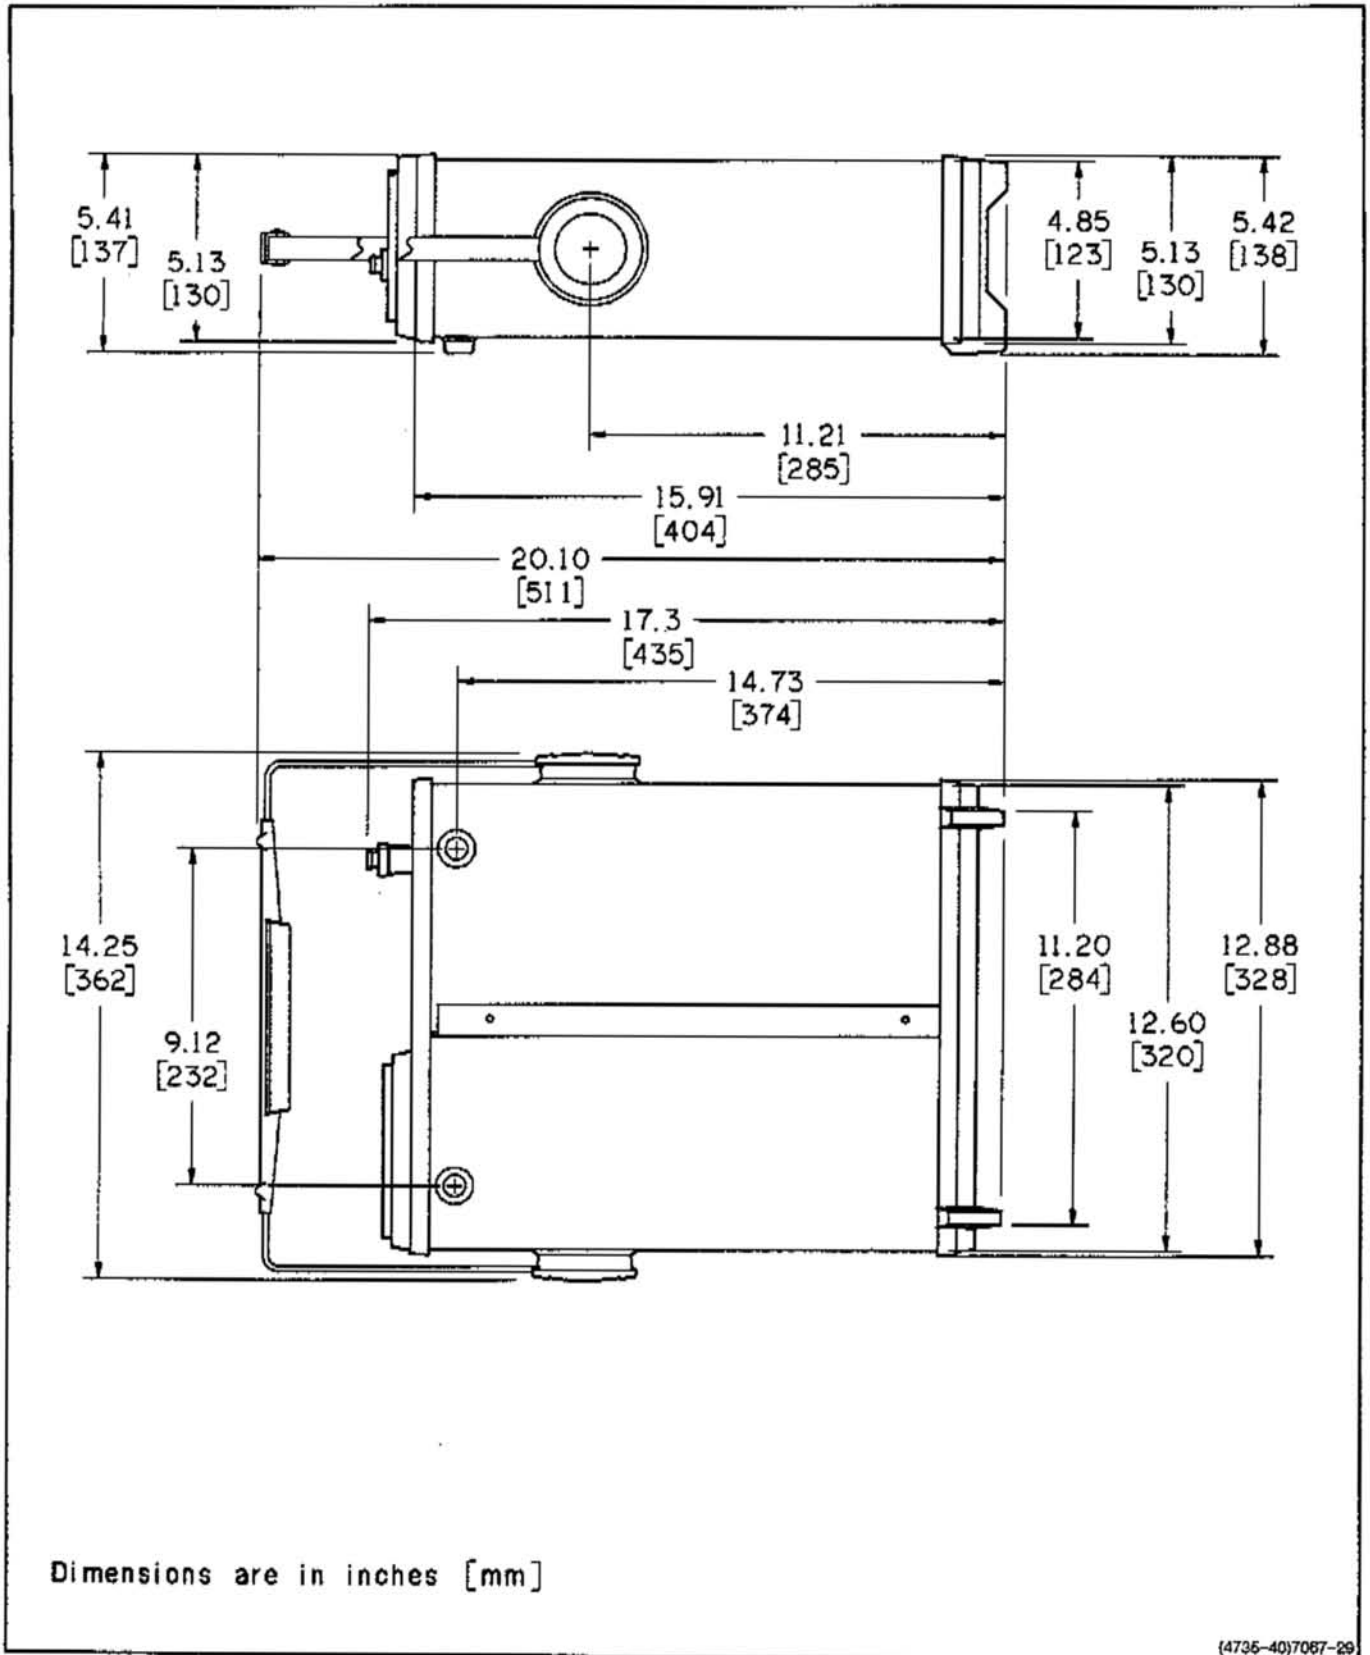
Physical dimensions of the 2232 Oscilloscope.
